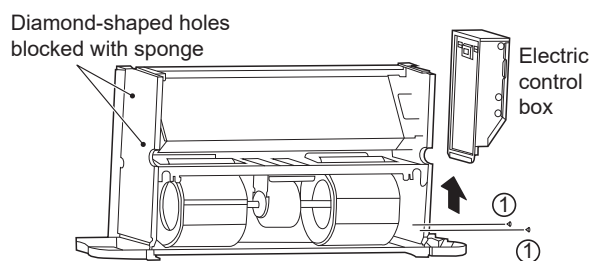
Removing the electric control box and blocking the diamond-shaped holes
